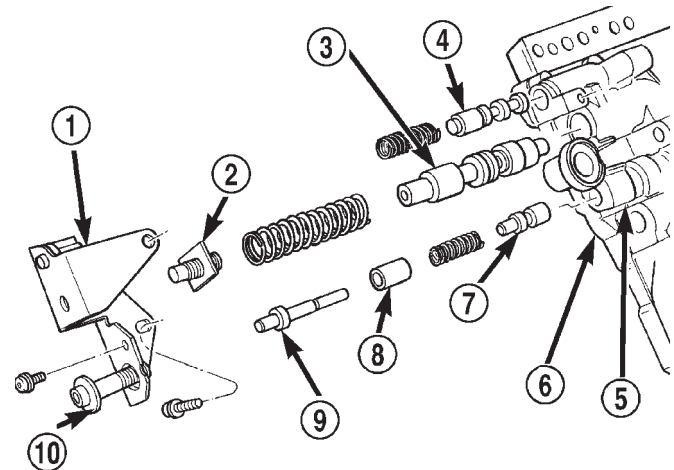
Adjusting Screw Bracket, Springs, Valve Removal
